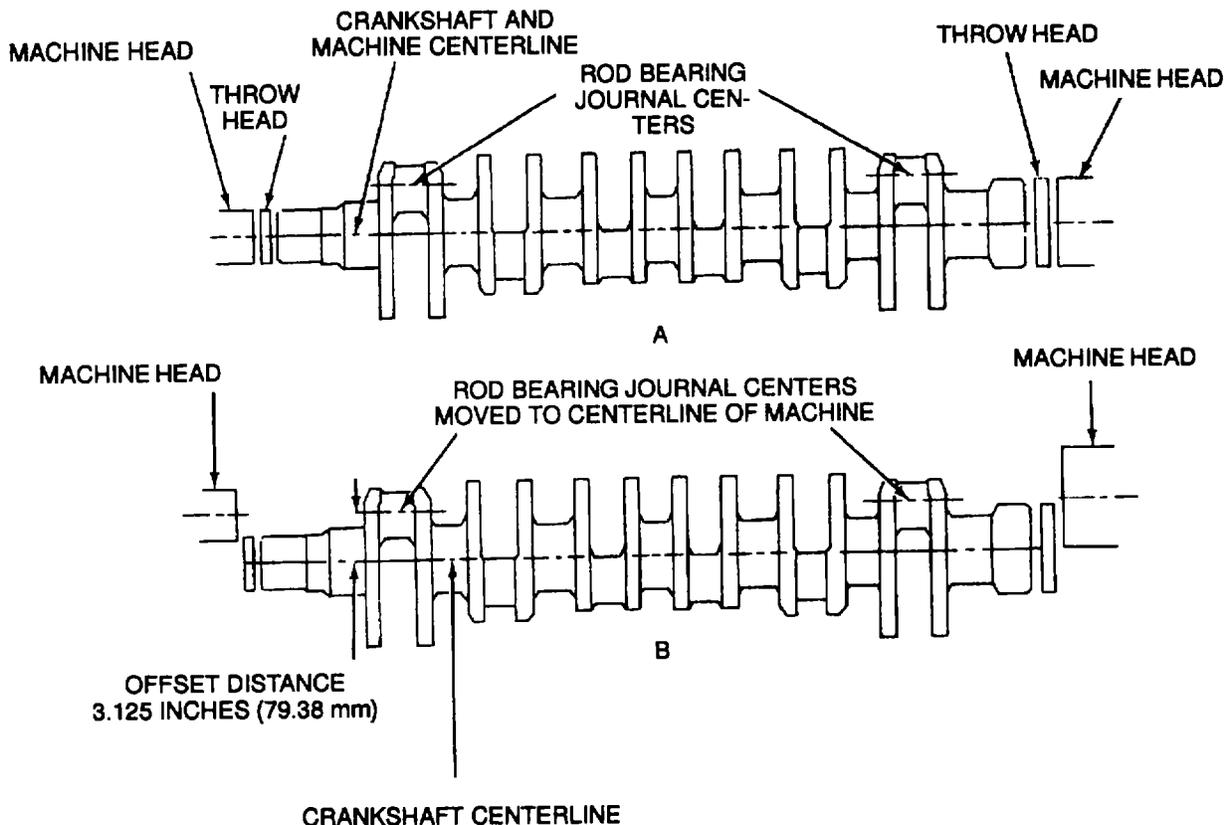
Crankshaft Offset To Grind Connecting Rod Bearing Journals
